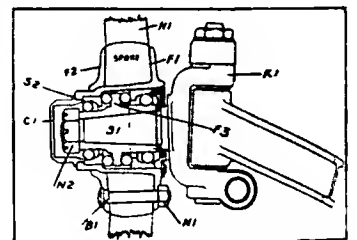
Sketch of the front wheel and knuckle, sectioned to depict ball bearings for radial and thrust loading.
